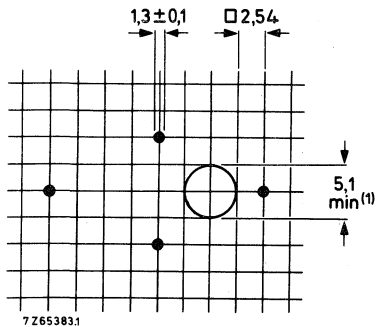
Hole pattern for mounting on a printed-wiring board.
